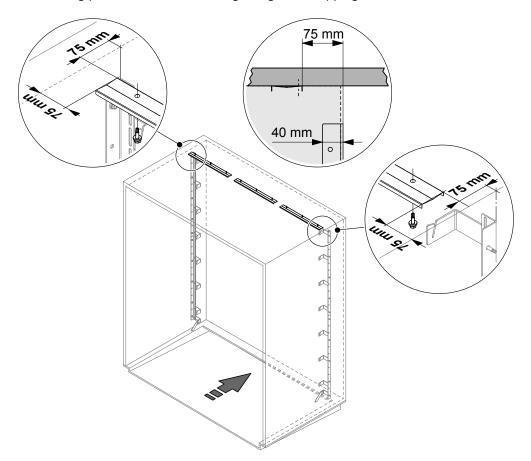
Mounting the fastening profiles for the upper sealing plates
